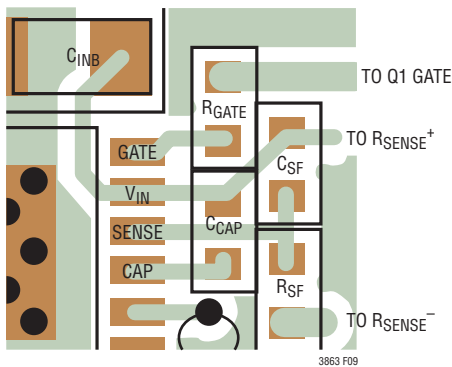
LTC3863 Recommended Gate Driver PC Board Placement, Layout and Routing
